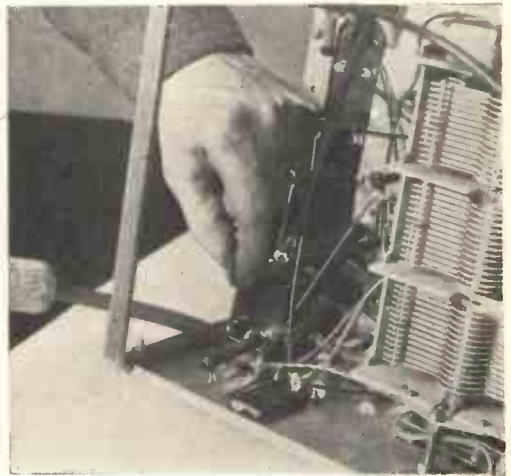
REMOVING THE L.F. TRANSFORMER.
